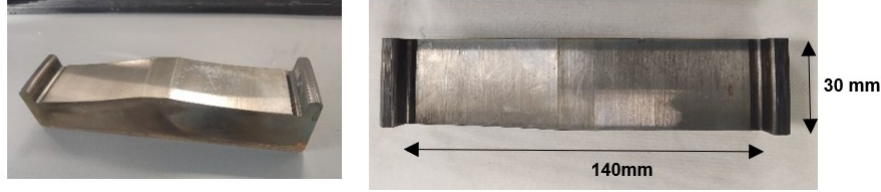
Lateral and top view of segments obtained from the non-corroded/reference bearing, Bearing A.
